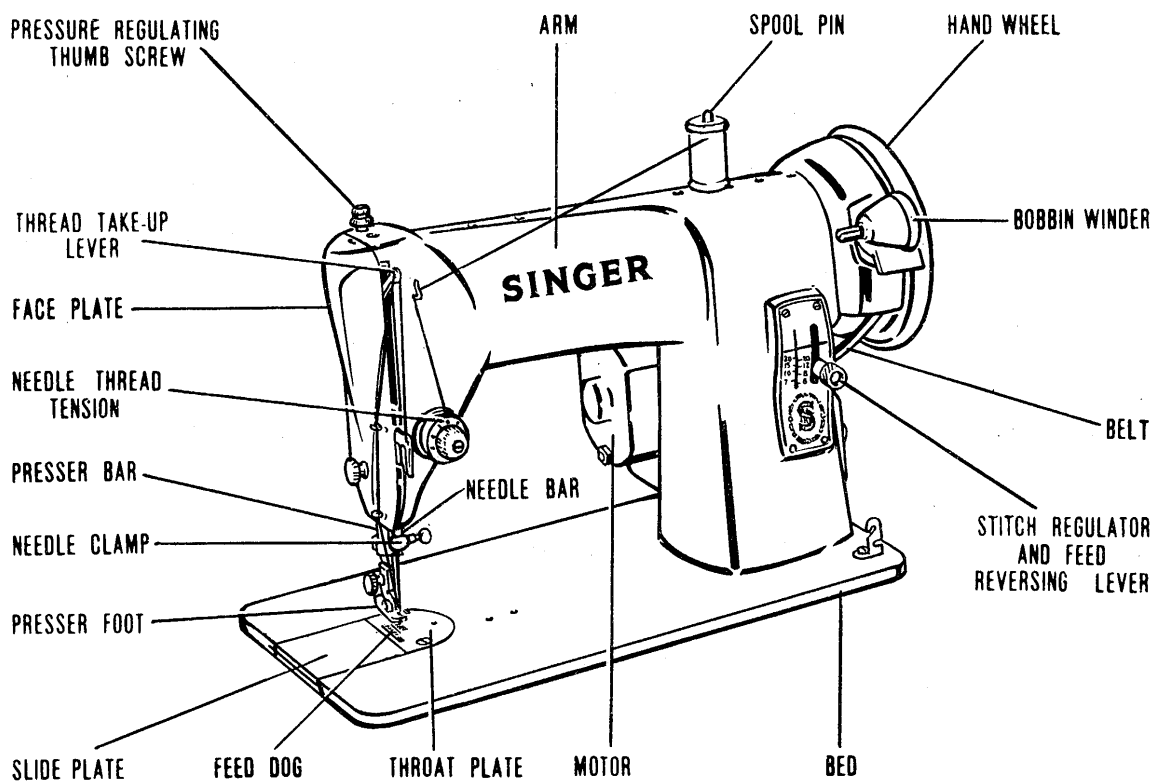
PRINCIPAL PARTS OF THE HEAD.
